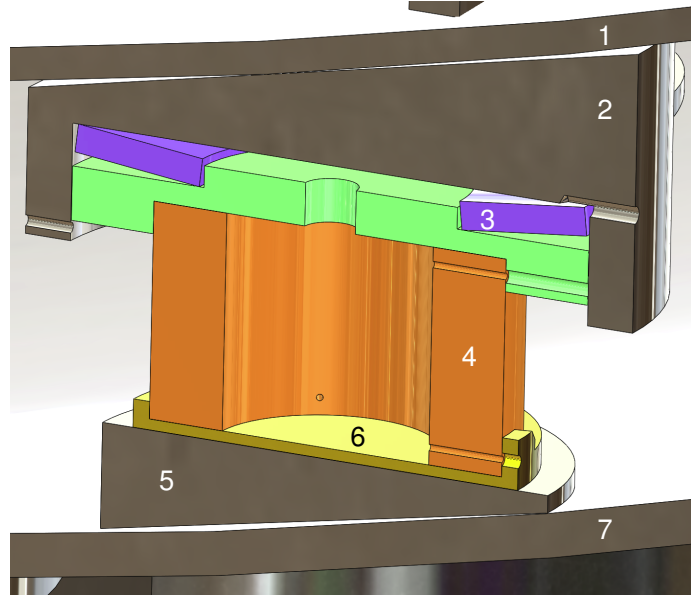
Close up of one of the eight supports on the bottom of the inner vessel consisting of the cage (2) for the Belleville spring (3) welded to the bottom vessel head of the inner vessel (1), the Torlon[®] cylinder (4) for thermal insulation, and the countersurface (5) at the bottom vessel head (7) of the outer vessel. The bronze shoe (6) for improved sliding has not been implemented.
